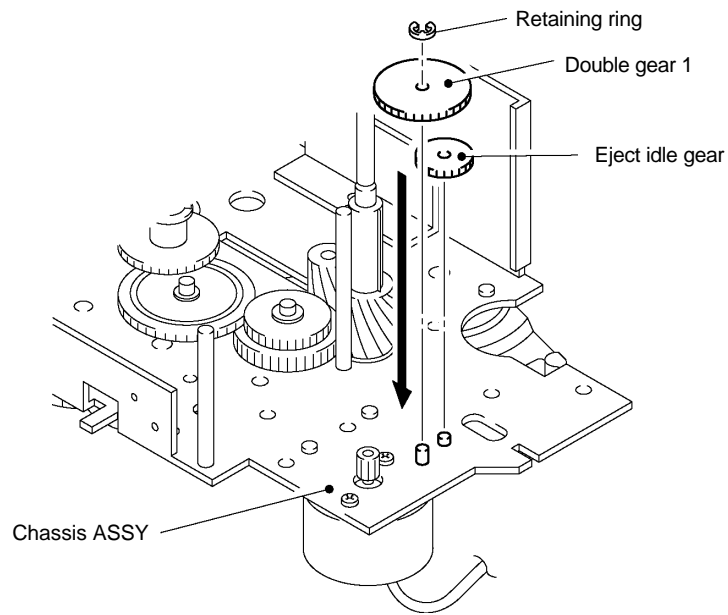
Reassembling the Eject Idle Gear and Double Gear 1
